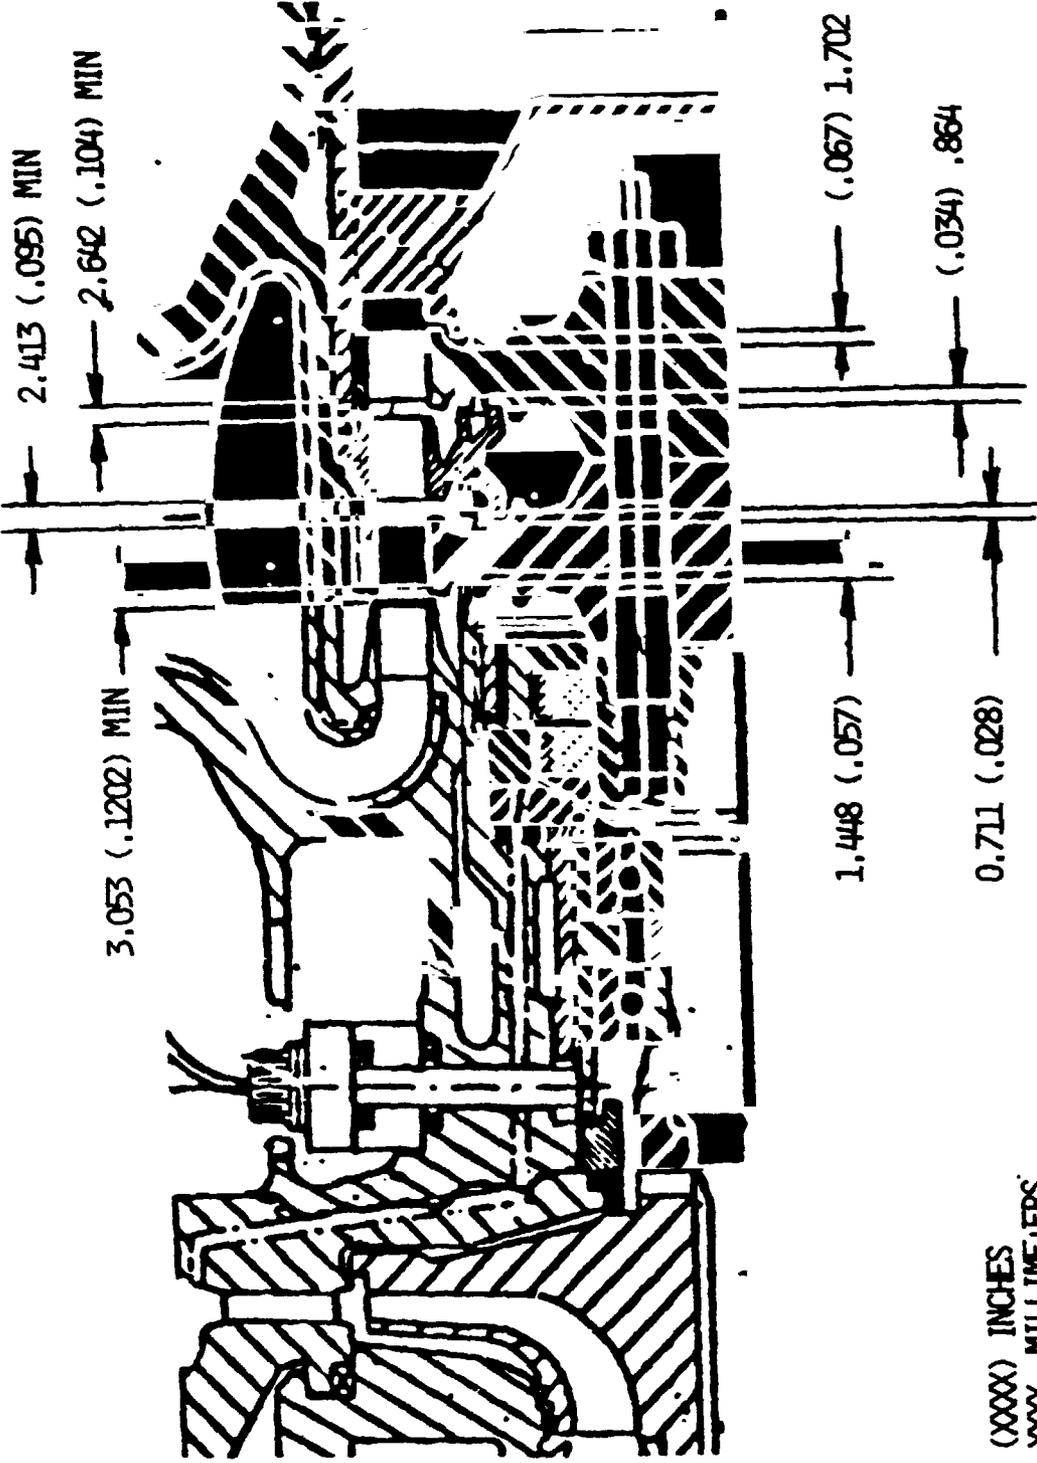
Mark 48-F Turbine Blading Axial Clearances
